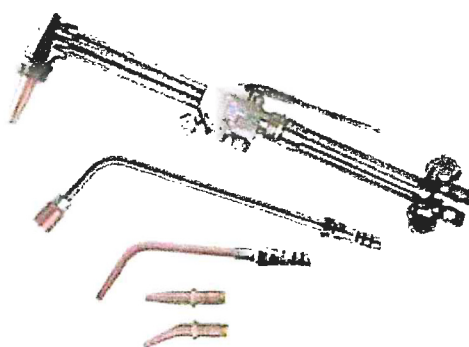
Torch handle with cutting, heating, and welding tips.
